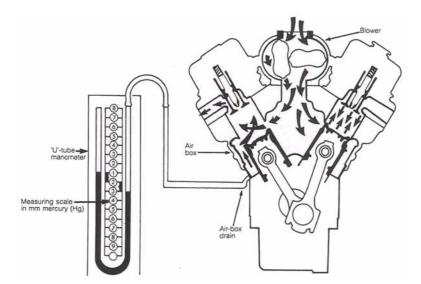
Measuring blower pressure with 'U' tube manometer - schematic view
